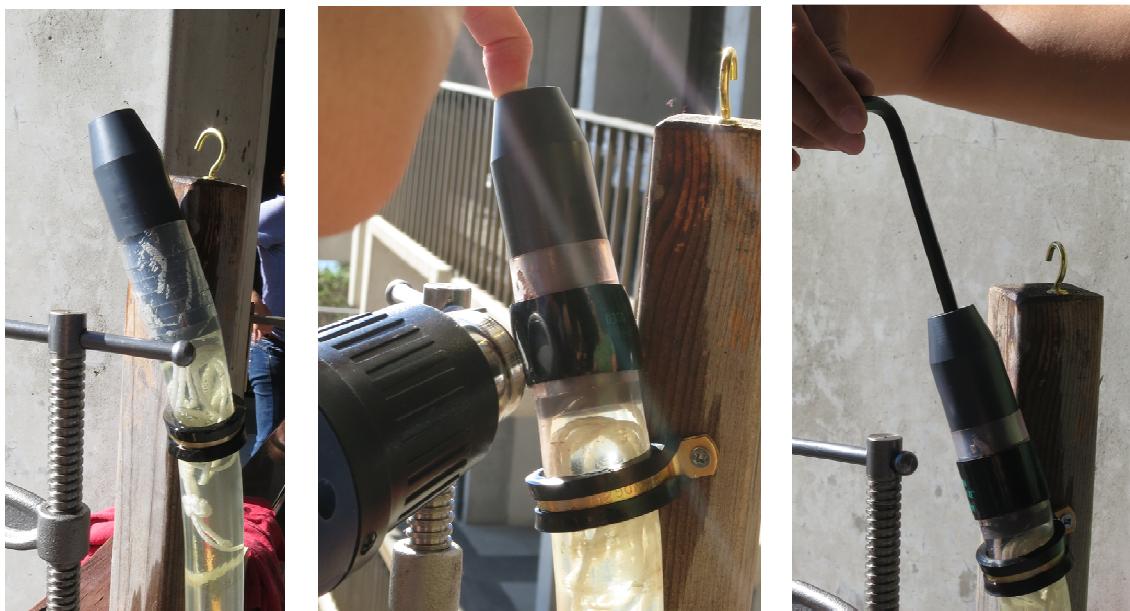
Once oil array is filled, end cap is put on the tubing, with a heat shrink hose clamp over the tubing at the position of the barbs. The screw is then placed in the end cap and tightened.
